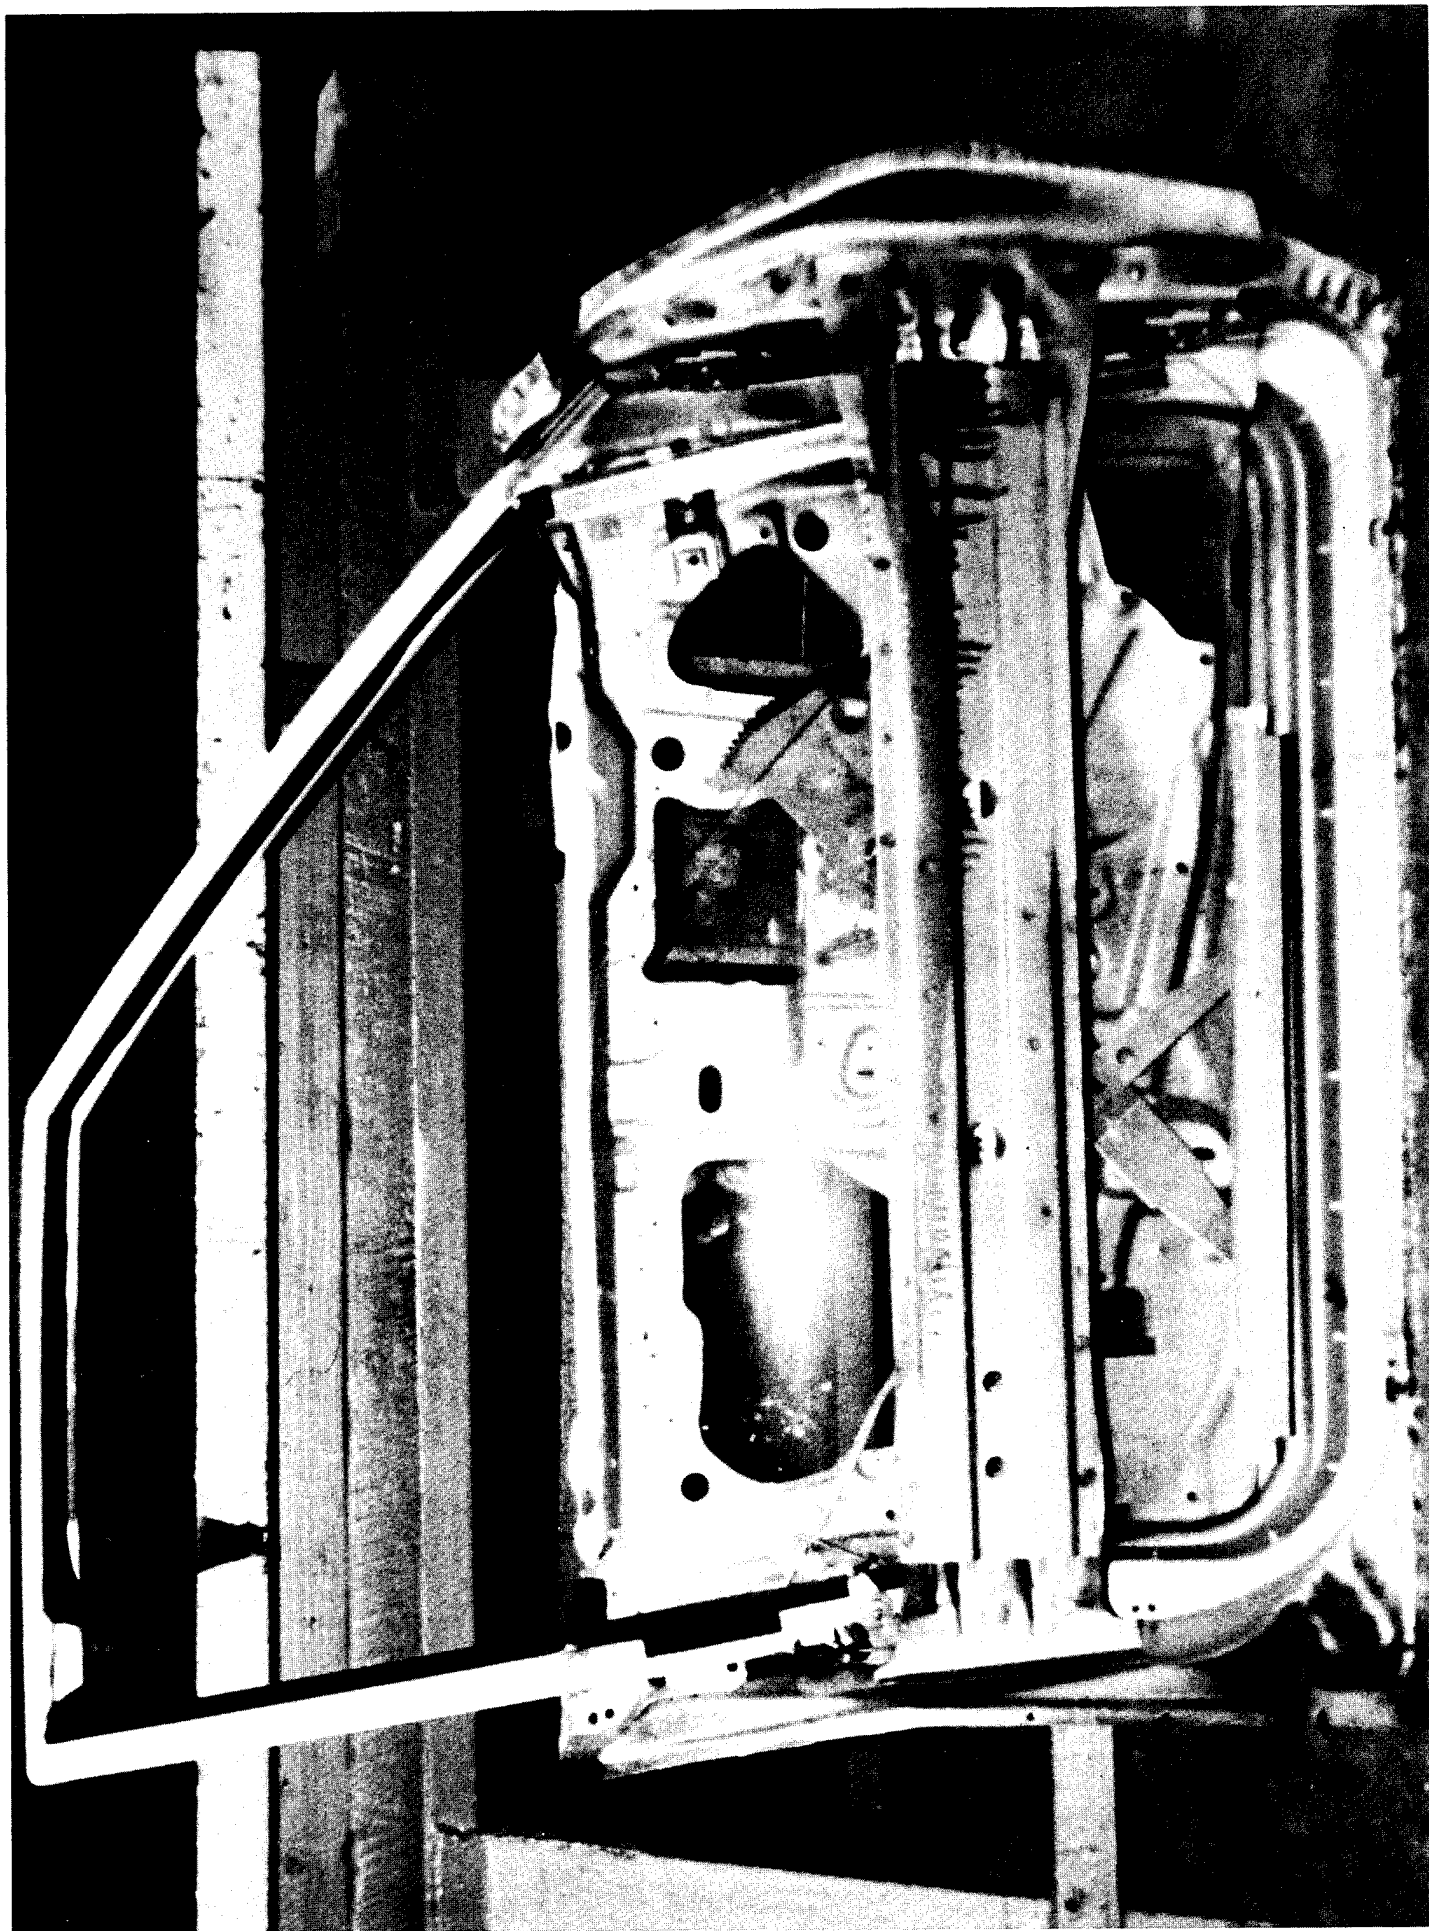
IMPALA DOOR AFTER REMOVAL OF OUTER SKIN
